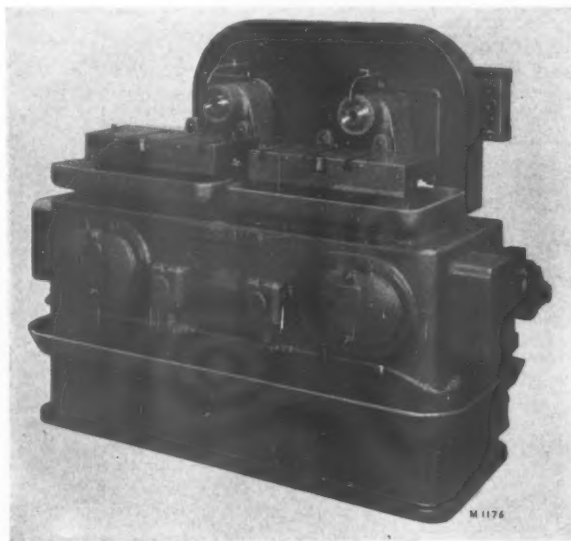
Special Rigidmil for milling grooves in spring steel yokes.
